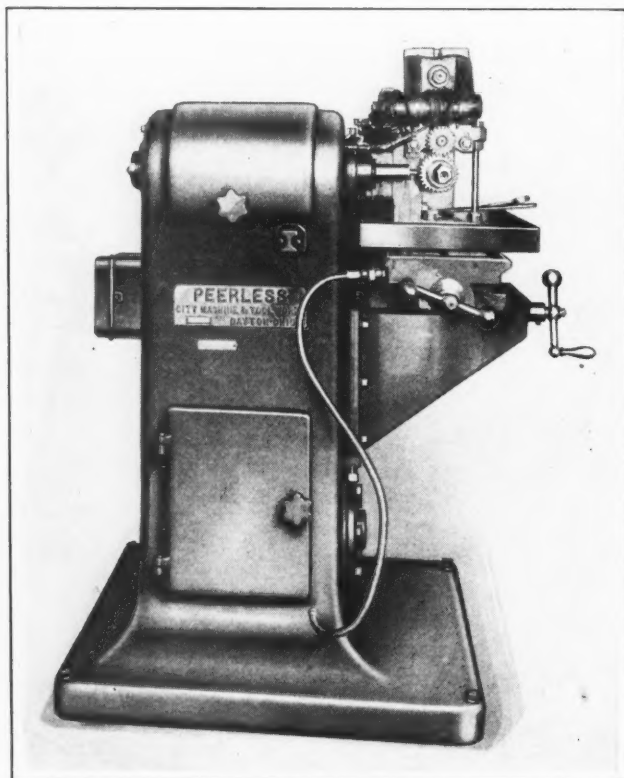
Gear-tooth Chamfering Machine Built by the City Machine & Tool Works
